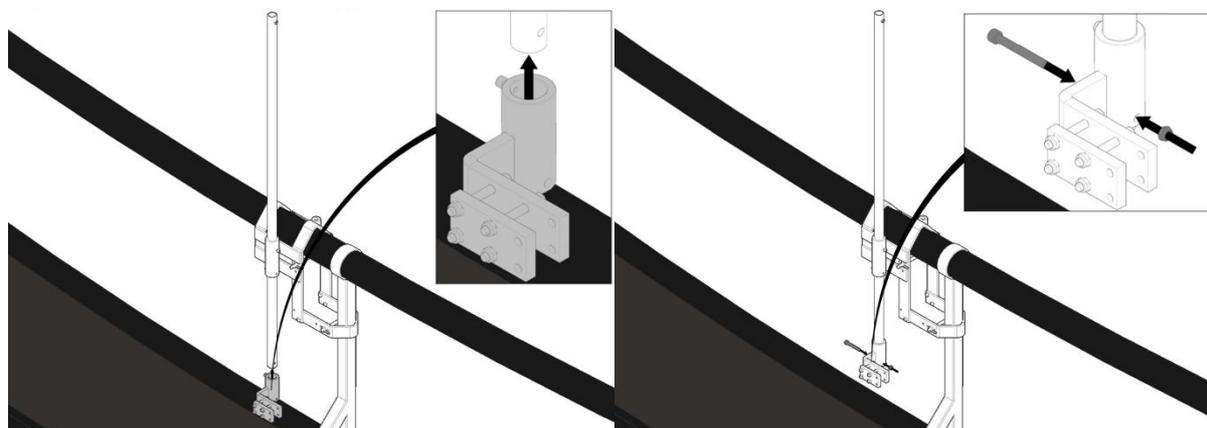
Mount the strain relief system for the fibre cable on the underside of the mounting bracket
